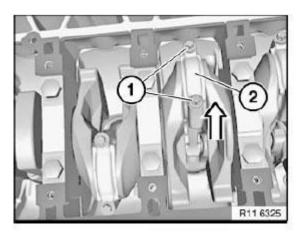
Identifying Conrod Bearing Cap And Bolts Courtesy of BMW OF NORTH AMERICA, INC.
